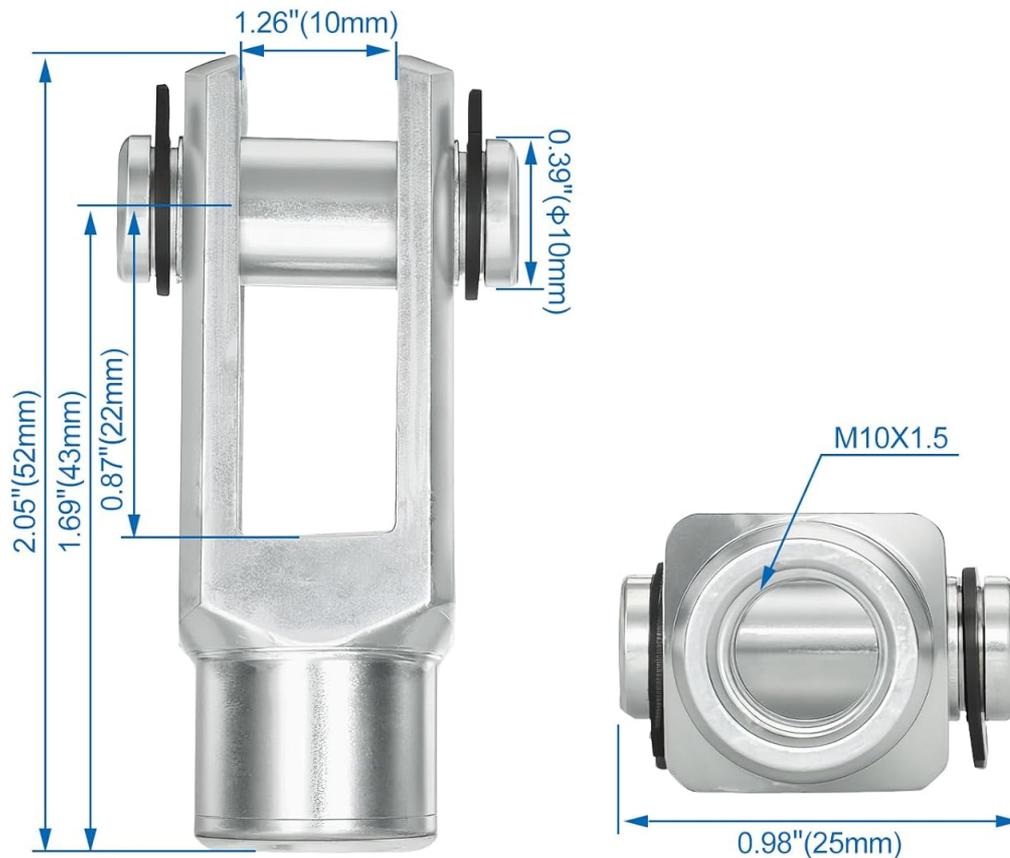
Illustration of the Y-Type Cylinder Flange's construction. The bracket is manufactured using a one-piece infusion molding process, ensuring high hardness, wear resistance, and strong bearing capacity.
